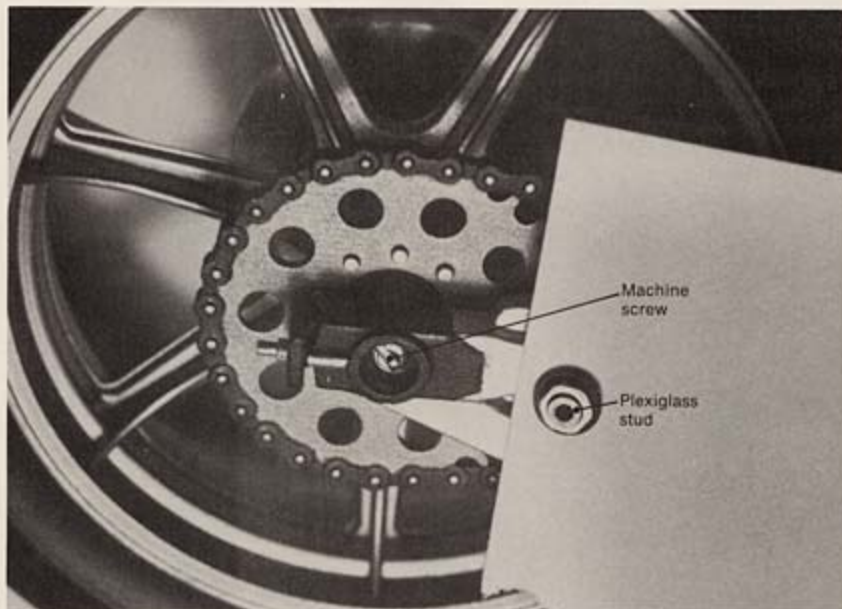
Modify or conceal the heads of machine screws. Here Paul's about to cap the countersunk screw head on the rear axle with a turned plexiglass stud.
